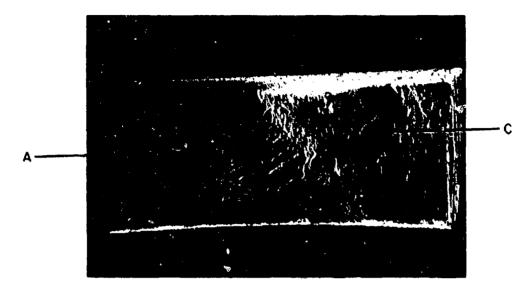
Tensile fracture surface of a hydrogen-embrittled A-514 weld specimen, 25x.
